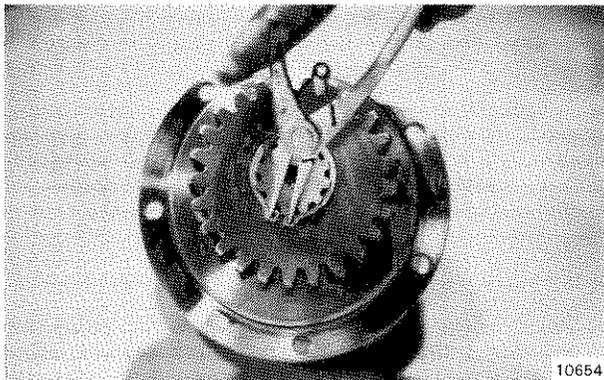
ASSEMBLY OF THE PTO GEAR ASSEMBLY WITH THE 117:1 GEAR RATIO
